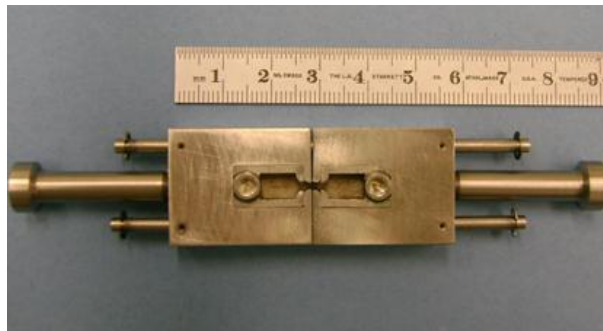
A cradle type grip for SS-J tensile specimens. This grip set was developed for shoulder loading as well as for easy loading of thin miniature specimens in hotcell.
